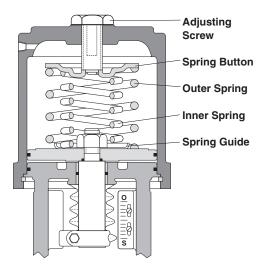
Piston cylinder actuator with dual springs. (Courtesy of Valtek International)
